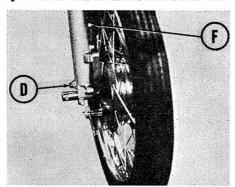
Oil in front forks is drained at screw (D). Oil should be maintained at level of filler screw hole (F).
